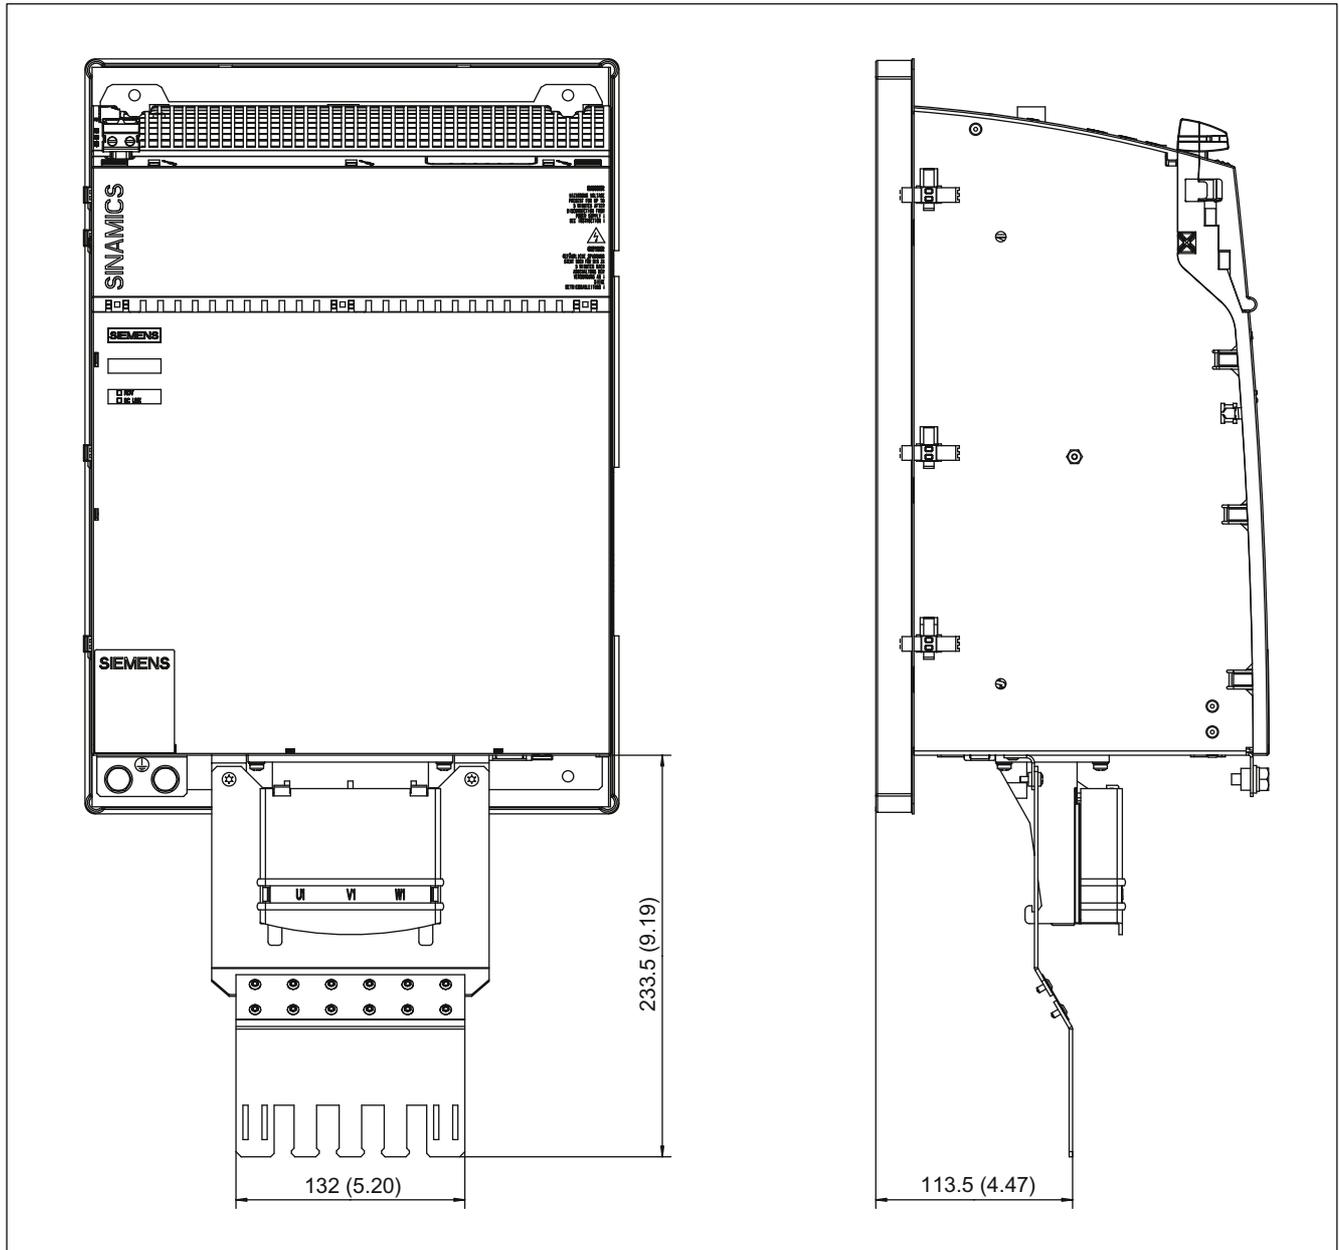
Dimension drawing of shield connecting plate on a 200 mm component with cold plate, all dimensions in mm and (inches)
